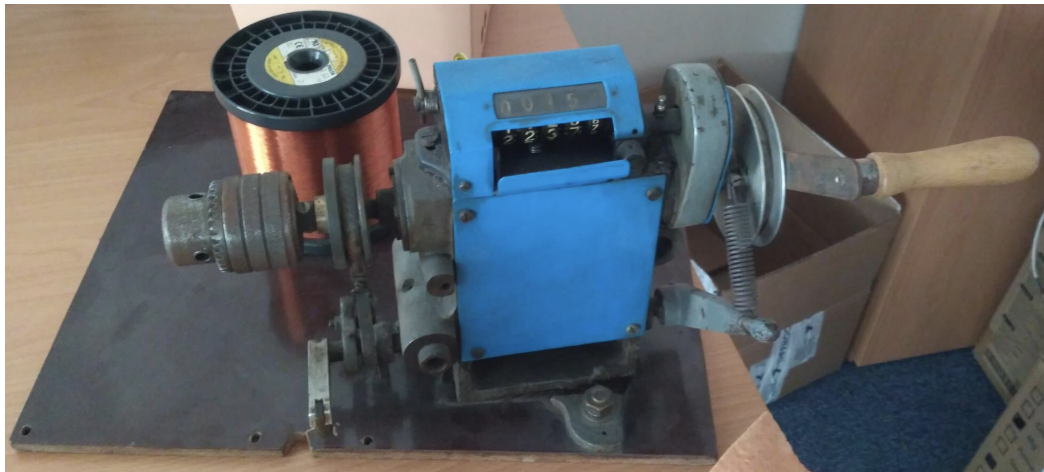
Front view of the manual drill used in the winding process of the Mirnov coils.
